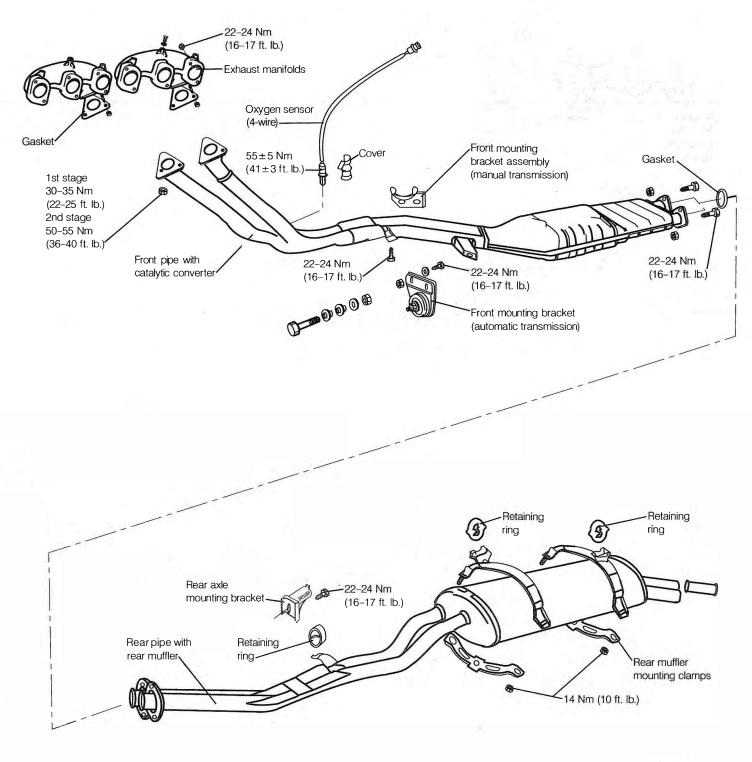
Exploded view of 325 and 325e(es) exhaust system.
